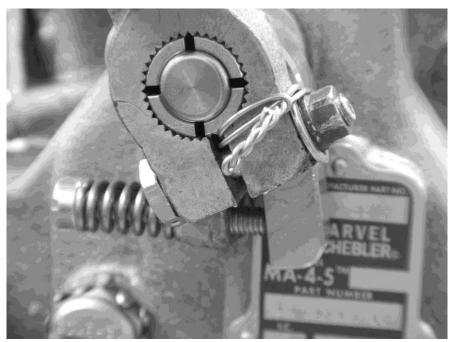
Safety Wiring of Throttle Arm to Carburetor Stop Arm
